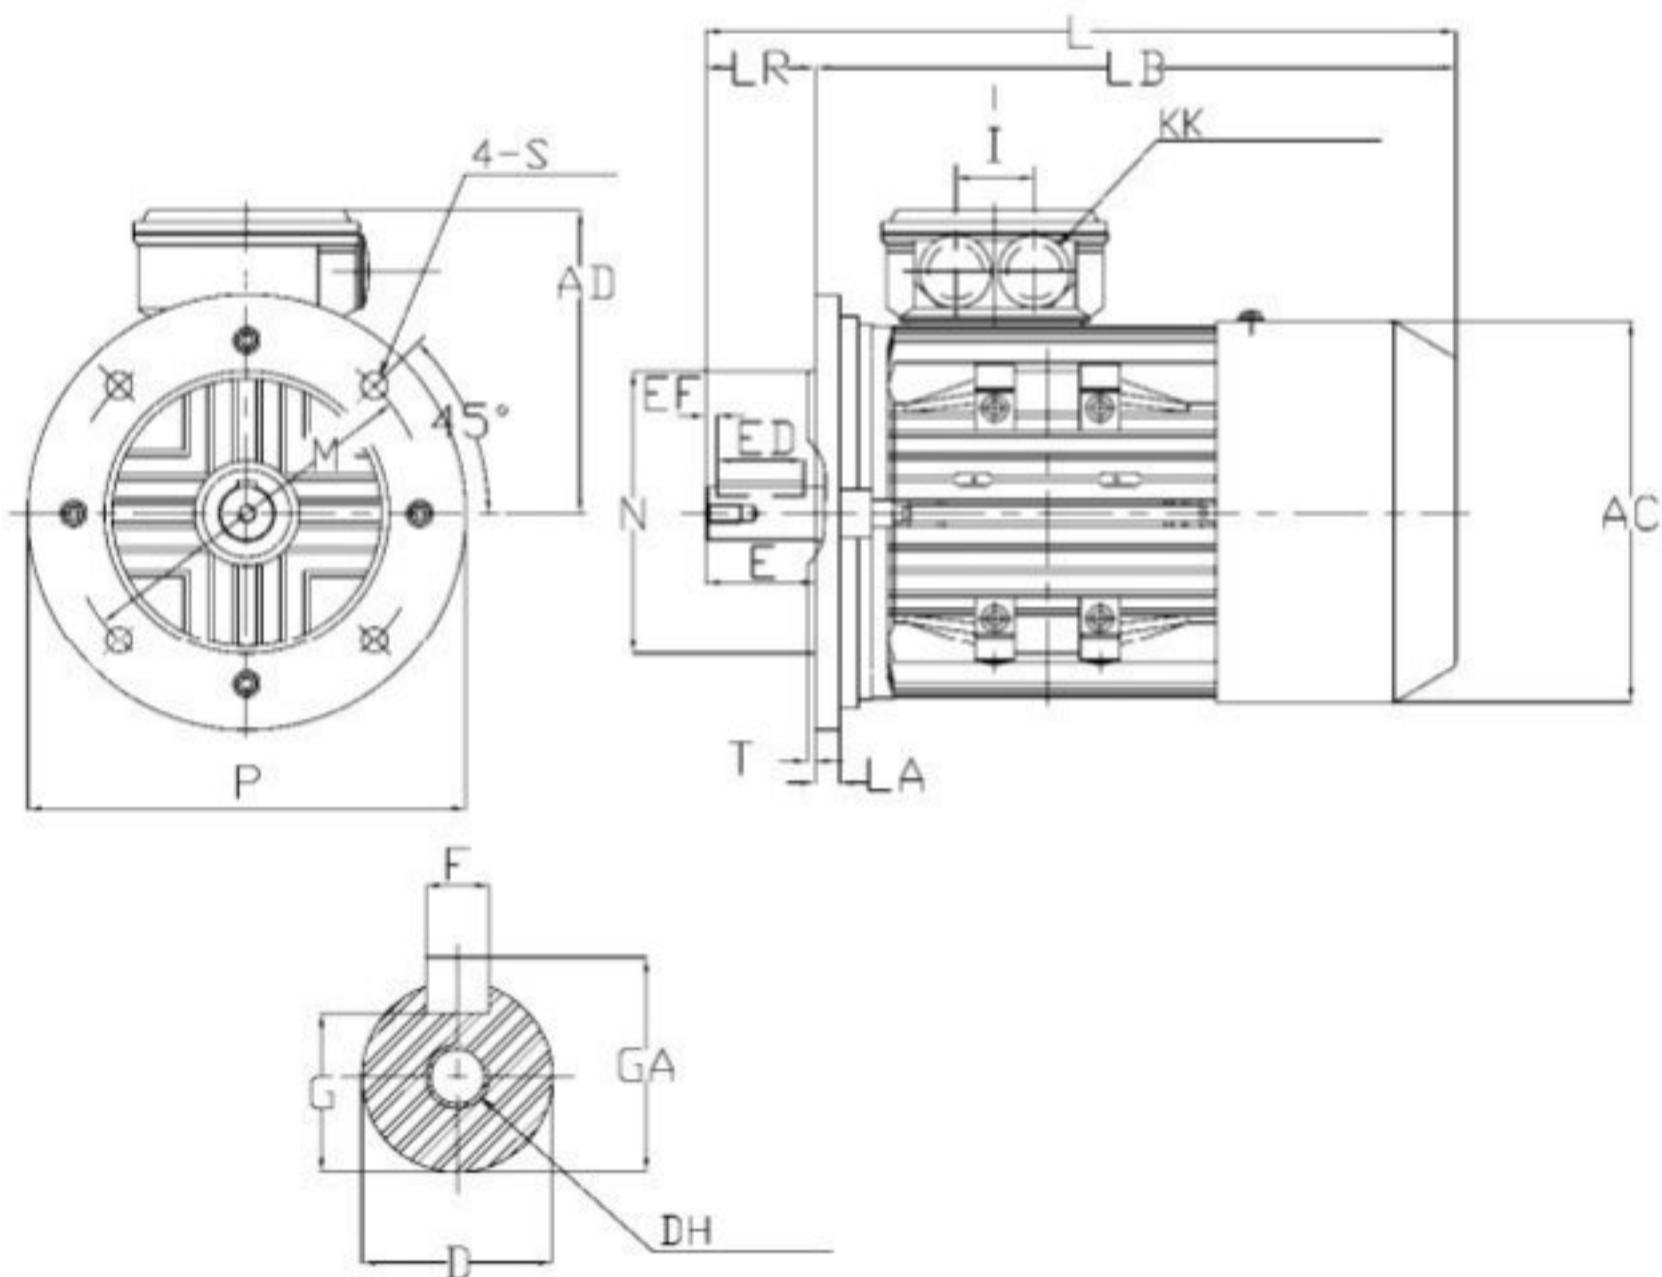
Outline drawing of aluminium design, flange version, mounting B5, frame size 63 – 160 (sample)
